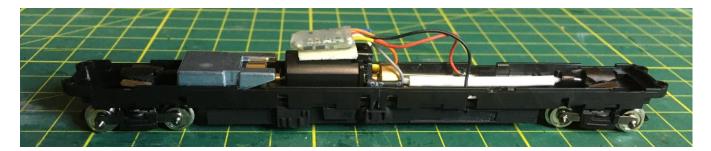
Completed chassis with underframe and bogie sideframe details in place
